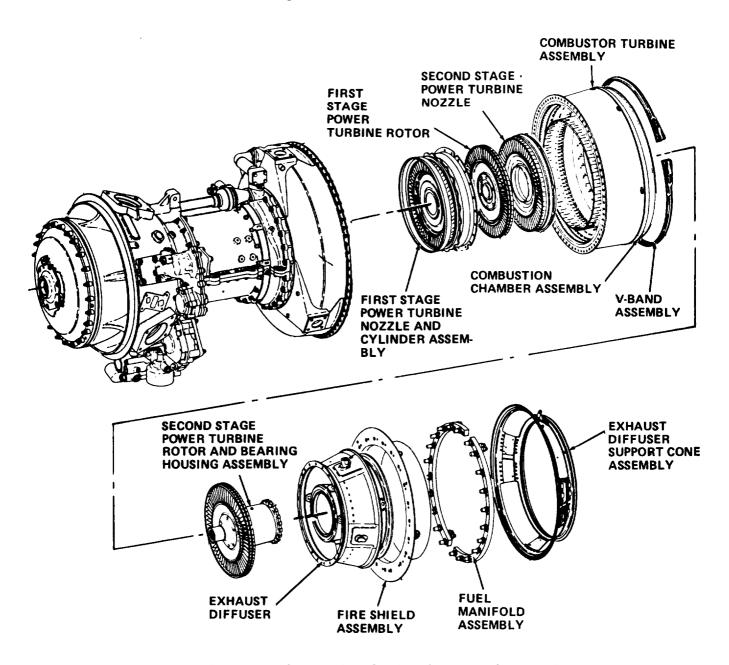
Combustion Section (T53-L-13B/703 Engines
